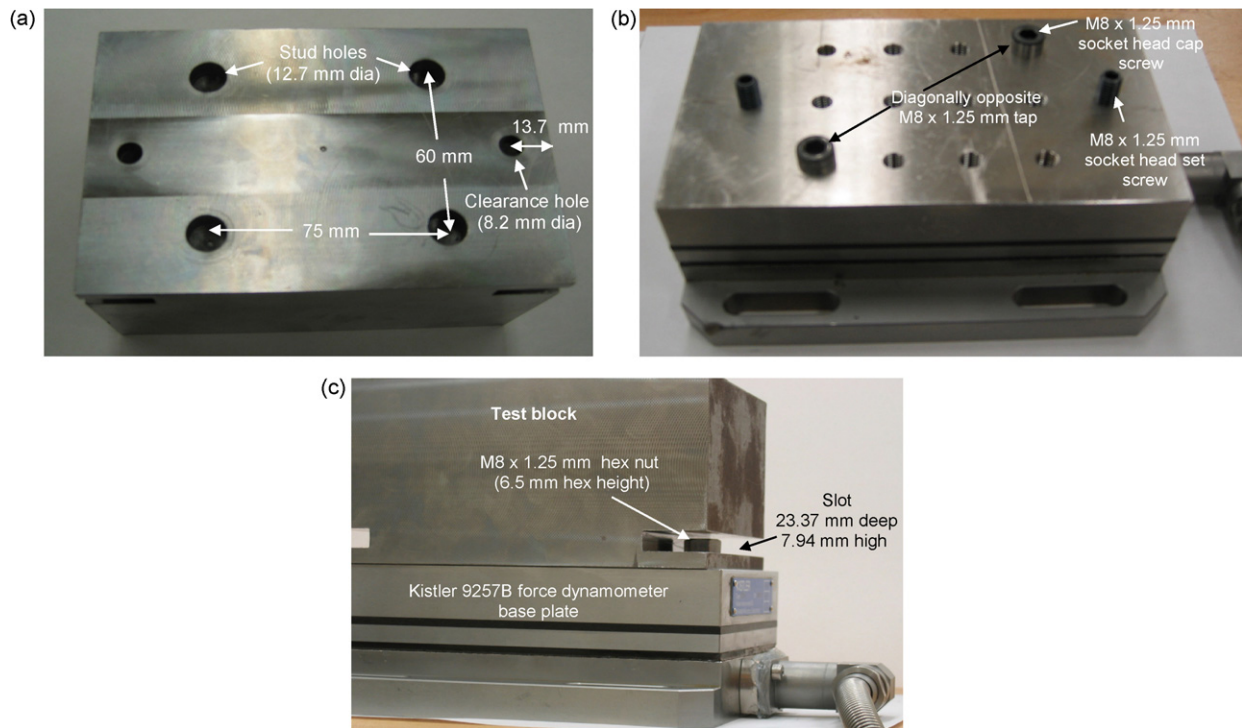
(a) Location of stud and clearance holes on bottom of test block, (b) location of socket head cap screw and socket head set screw on Kistler force dynamometer (Type- 9257B) base plate, and (c) assembly of test block on Kistler dynamometer base plate.
